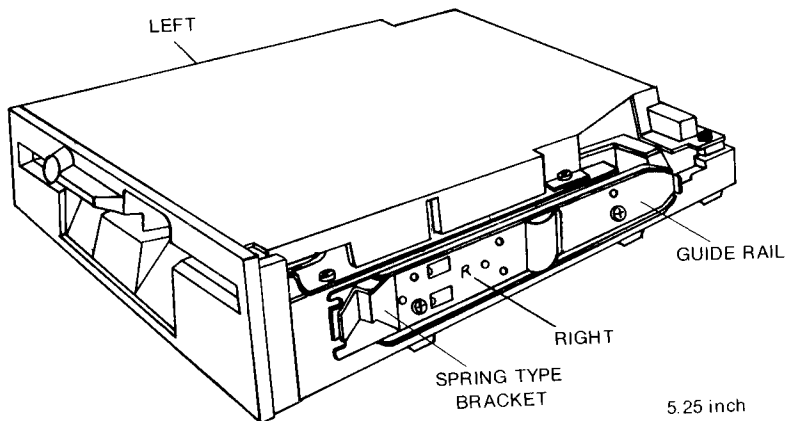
Guide Rail and Bracket mounted on side 5.25 inch FDD
